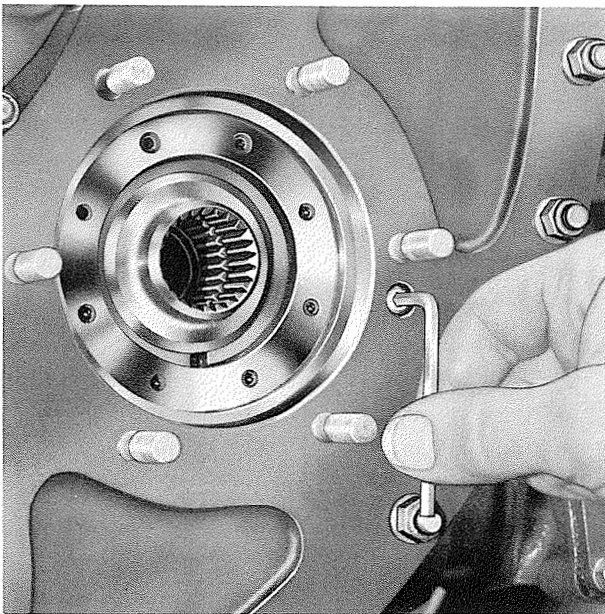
Removing Plug from Pressure Oil Supply Hole
